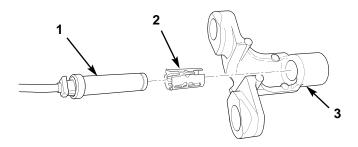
Wheel Sensor, Clamp Sleeve, and Mounting Bracket.
